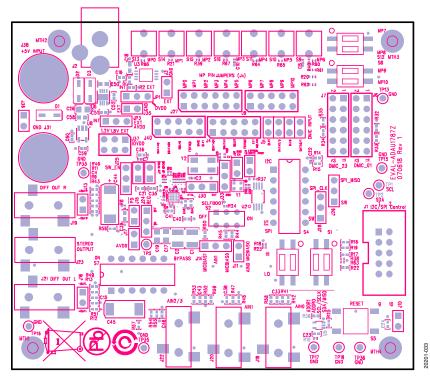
EVAL-ADAU1787Z Layout: Top Assembly
